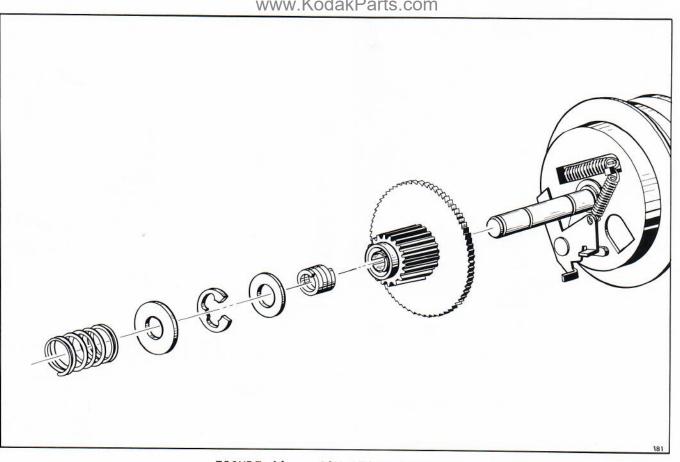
CAM STACK ASSEMBLY (DRIVE SIDE)
